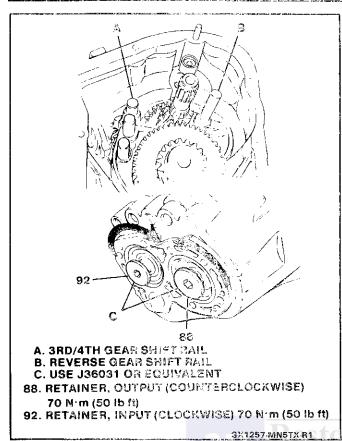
Engaging Transmission in Gear Shaft Support Components Installation
